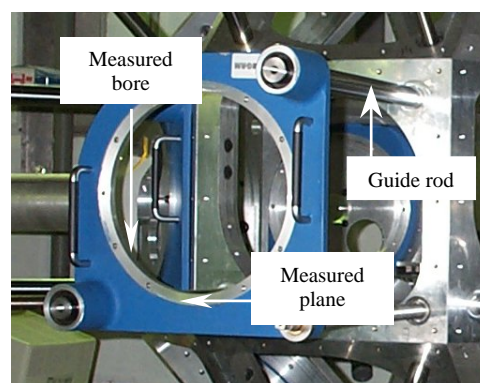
View of a movable housing at the outer limit of its movement along the guide rods
